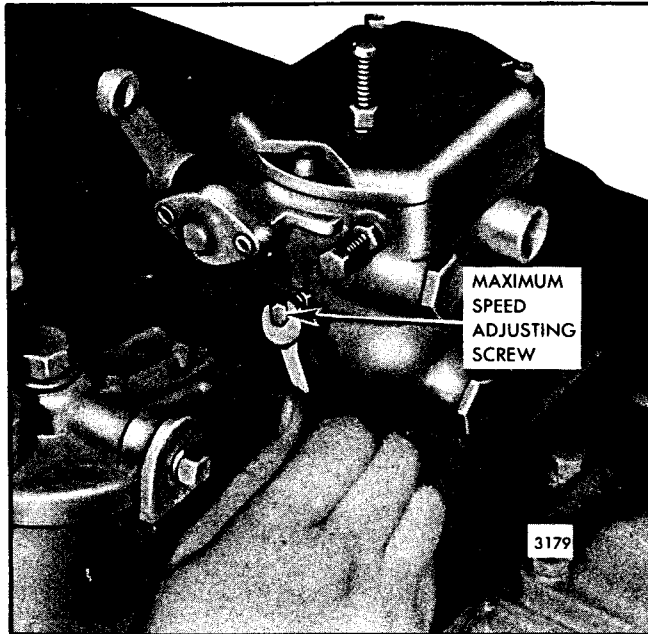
Adjusting Maximum No-Load Engine Speed
